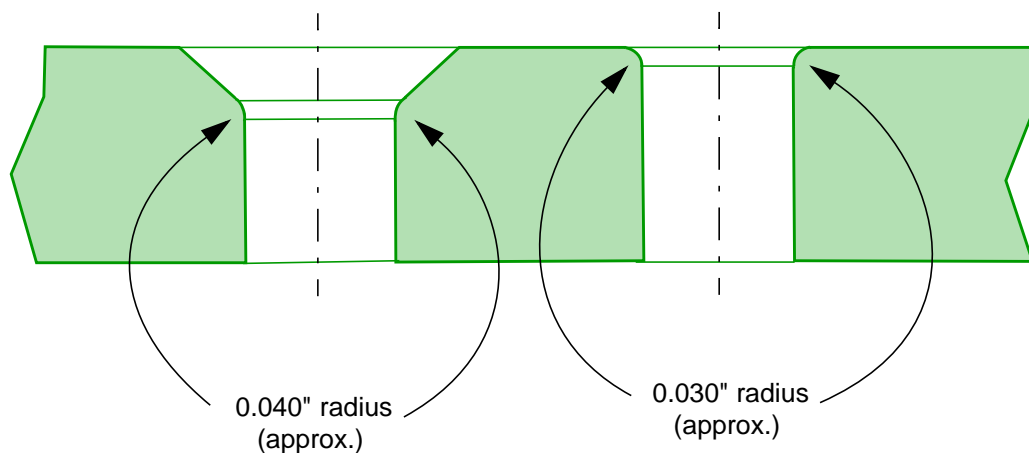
Radiusing of Hole Edges for Fastener Seating
